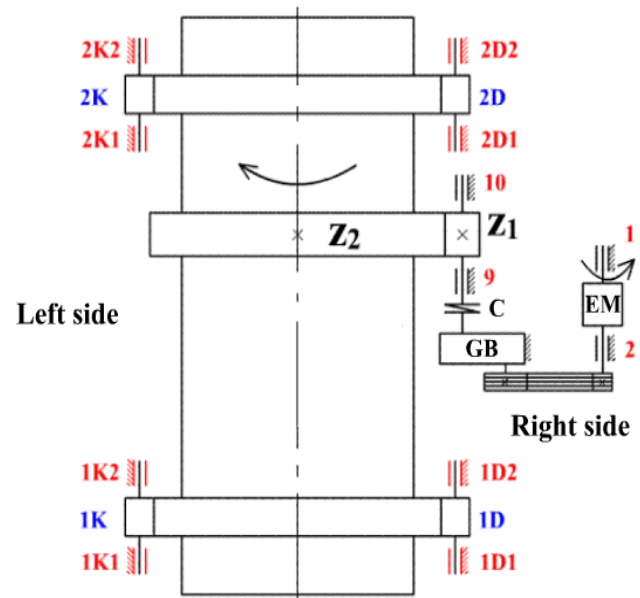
Kinematic scheme of high mass horizontal cylinder machine: EM – asynchronous electric motor, GB – gear box, C – elastic coupling, z_1 and z_2 – driving and driven spur gears; 1D, 1K, 2D and 2K – cylindrical wheels; D1, 1D2, 1K1, 1K2, 2D1, 2D2, 2K1 2K2, 9 and 10- double row spherical roller bearings SKF 22228 CCK/W33 with a tapered bore H3128
